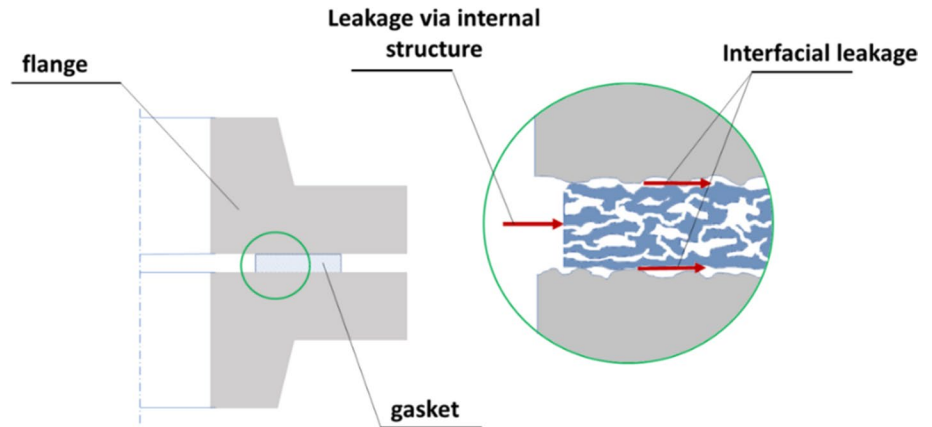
Mechanism of a spiral wound gasket filled with EG
